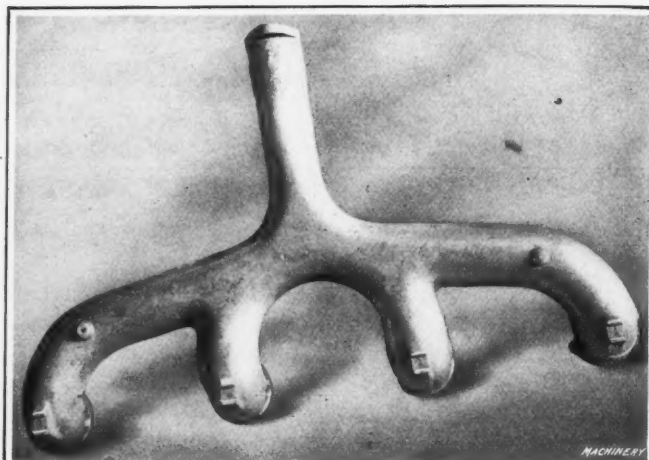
Aluminum Inlet Manifold—Repairs Completed
